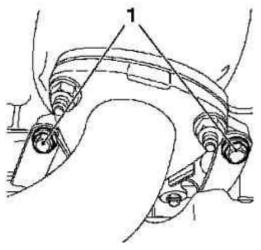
Mounting bracket catalytic converter: 1 - Bolts
